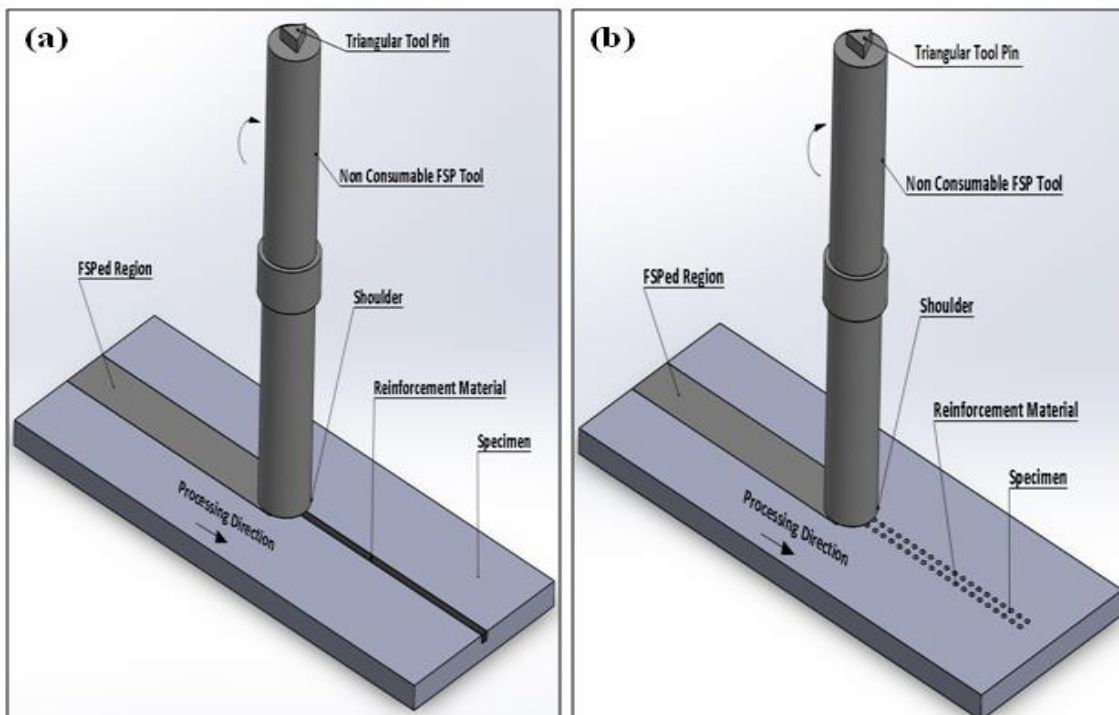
(a, b) Schematic drawing of triangular pin profile with groove and holes methods
